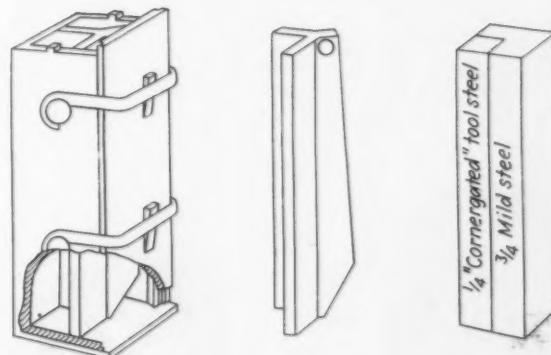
The mold design used to cast one corner of molten tool steel against a body of mild steel.
